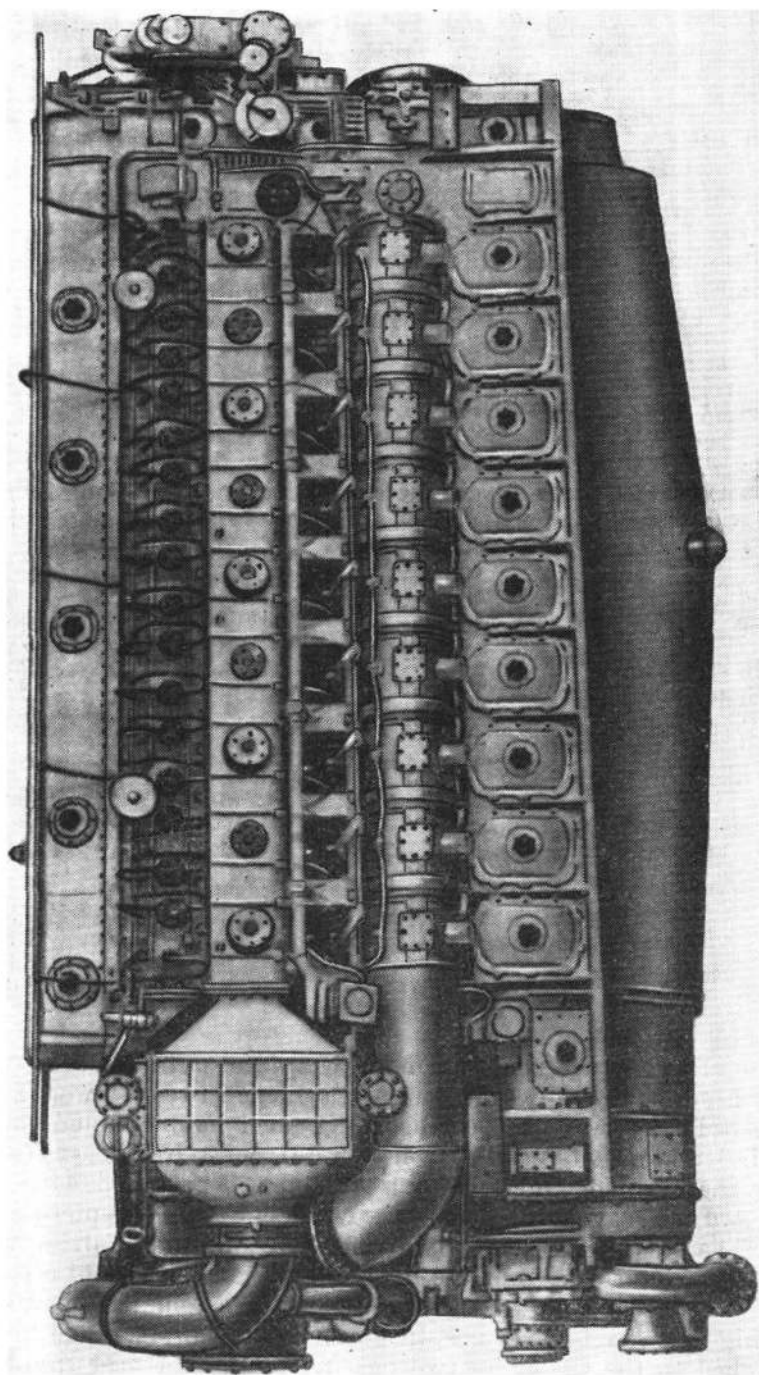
General view of type ДПН and ДРПН 23/2×30 diesel engine
